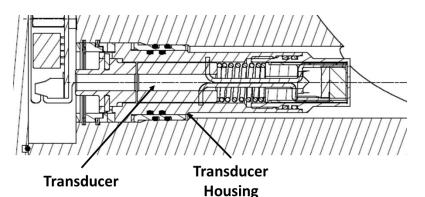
Transducer, Compression Screw Removed (1 inch housing shown)
